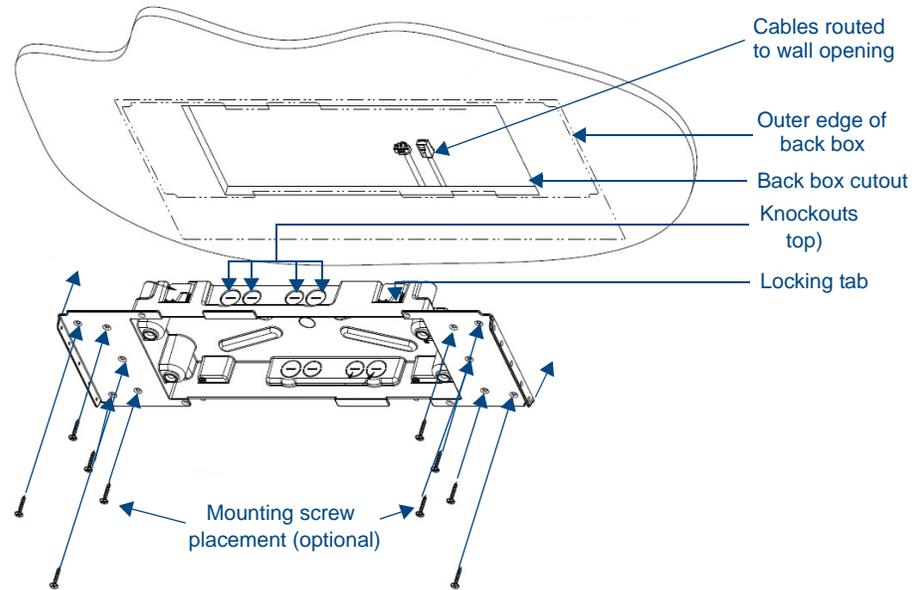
MXD-2000XL-PAN Back Box installation (Landscape)
